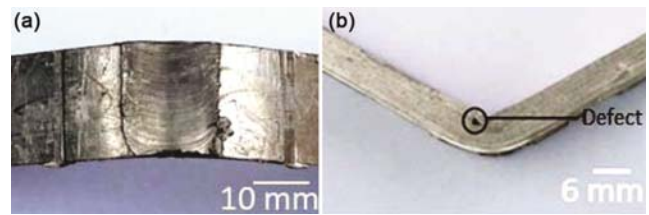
Views of weld 8 after flexural test (a) surface and (b) side.
